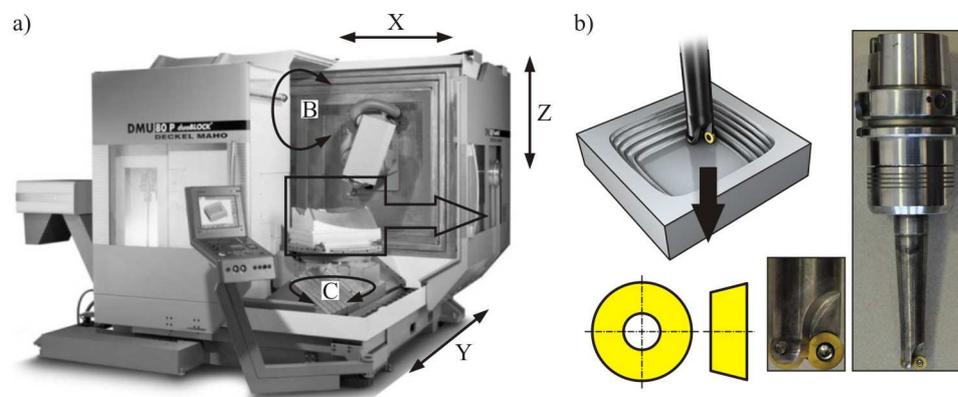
The DMU 80P duoBLOCK machine tool operating in the Research and Development Laboratory for Aerospace Materials at the Rzeszów University of Technology: a) controlled axes, b) enlarged view of the profiling mill cutter with round inserts CoroMill 300 and workpiece
